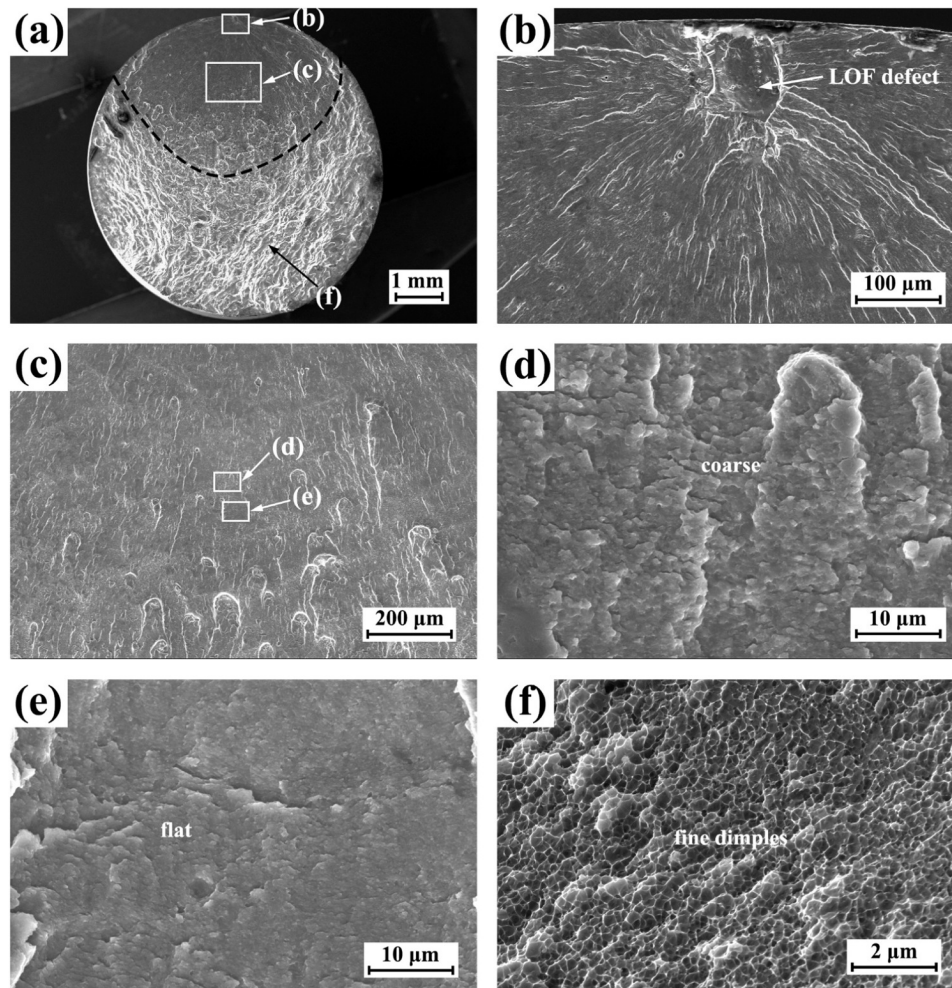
Fracture surfaces of the AF-SLM specimen,  $S_{\max} = 200$  MPa,  $N = 75,633$ . (a) global view, (b) fatigue initiation, (c) crack propagation, (d) coarse facet, (e) fine facet, (f) final fracture.
